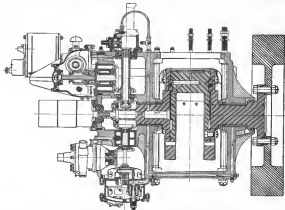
LONGITUDINAL CROSS-SECTION OF UNIVERSAL TEST ENGINE
